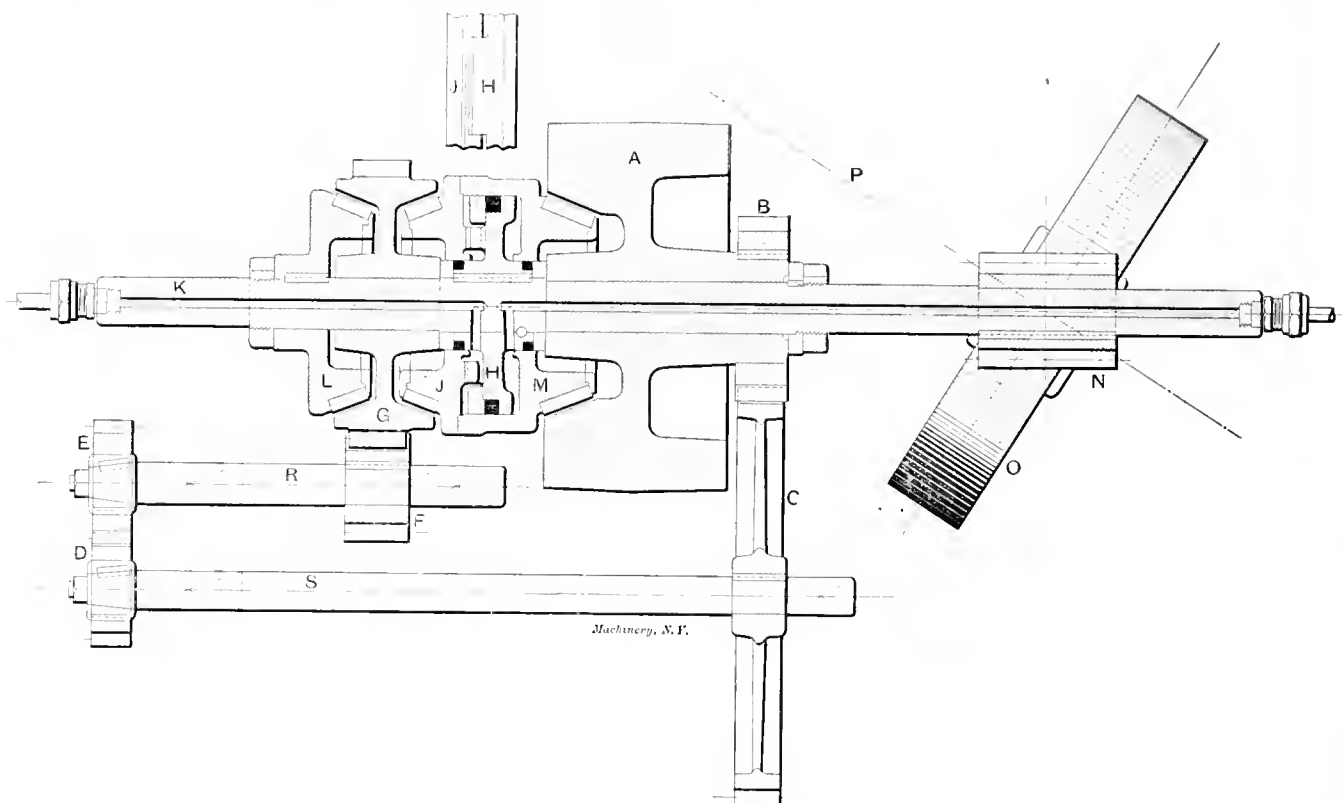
Sectional View, showing Drive and Reversing Mechanism.
